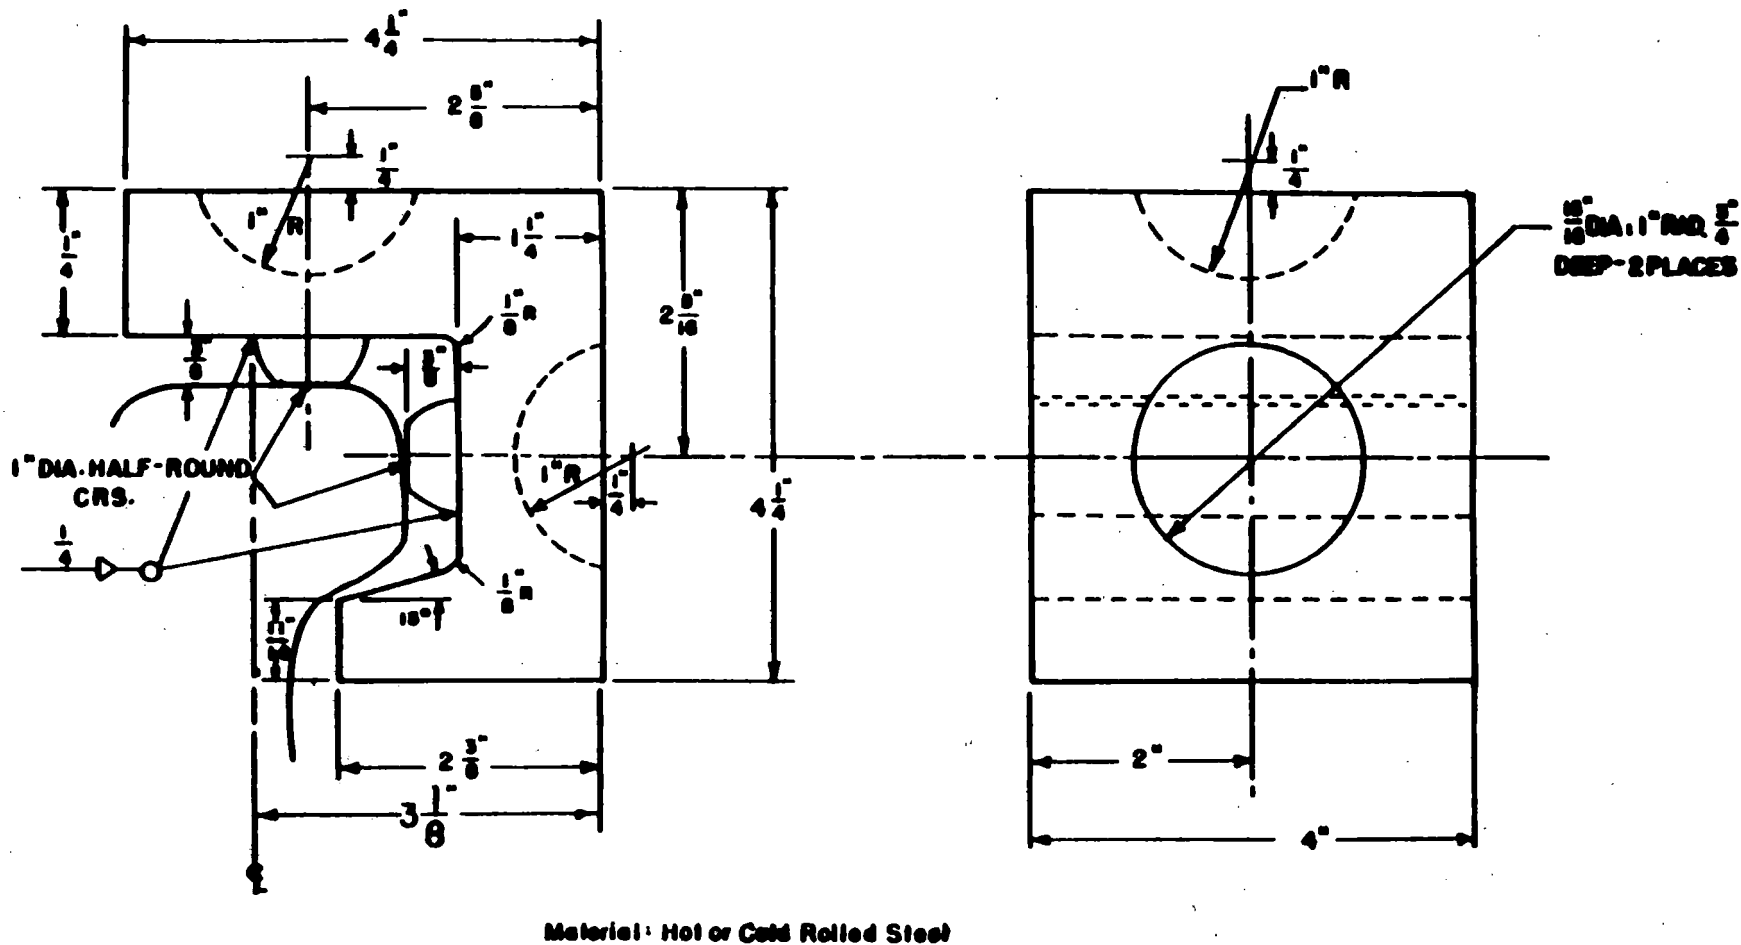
Loading Block Used to Apply the Gage Widening Loads During the Gage Widening Tests.
